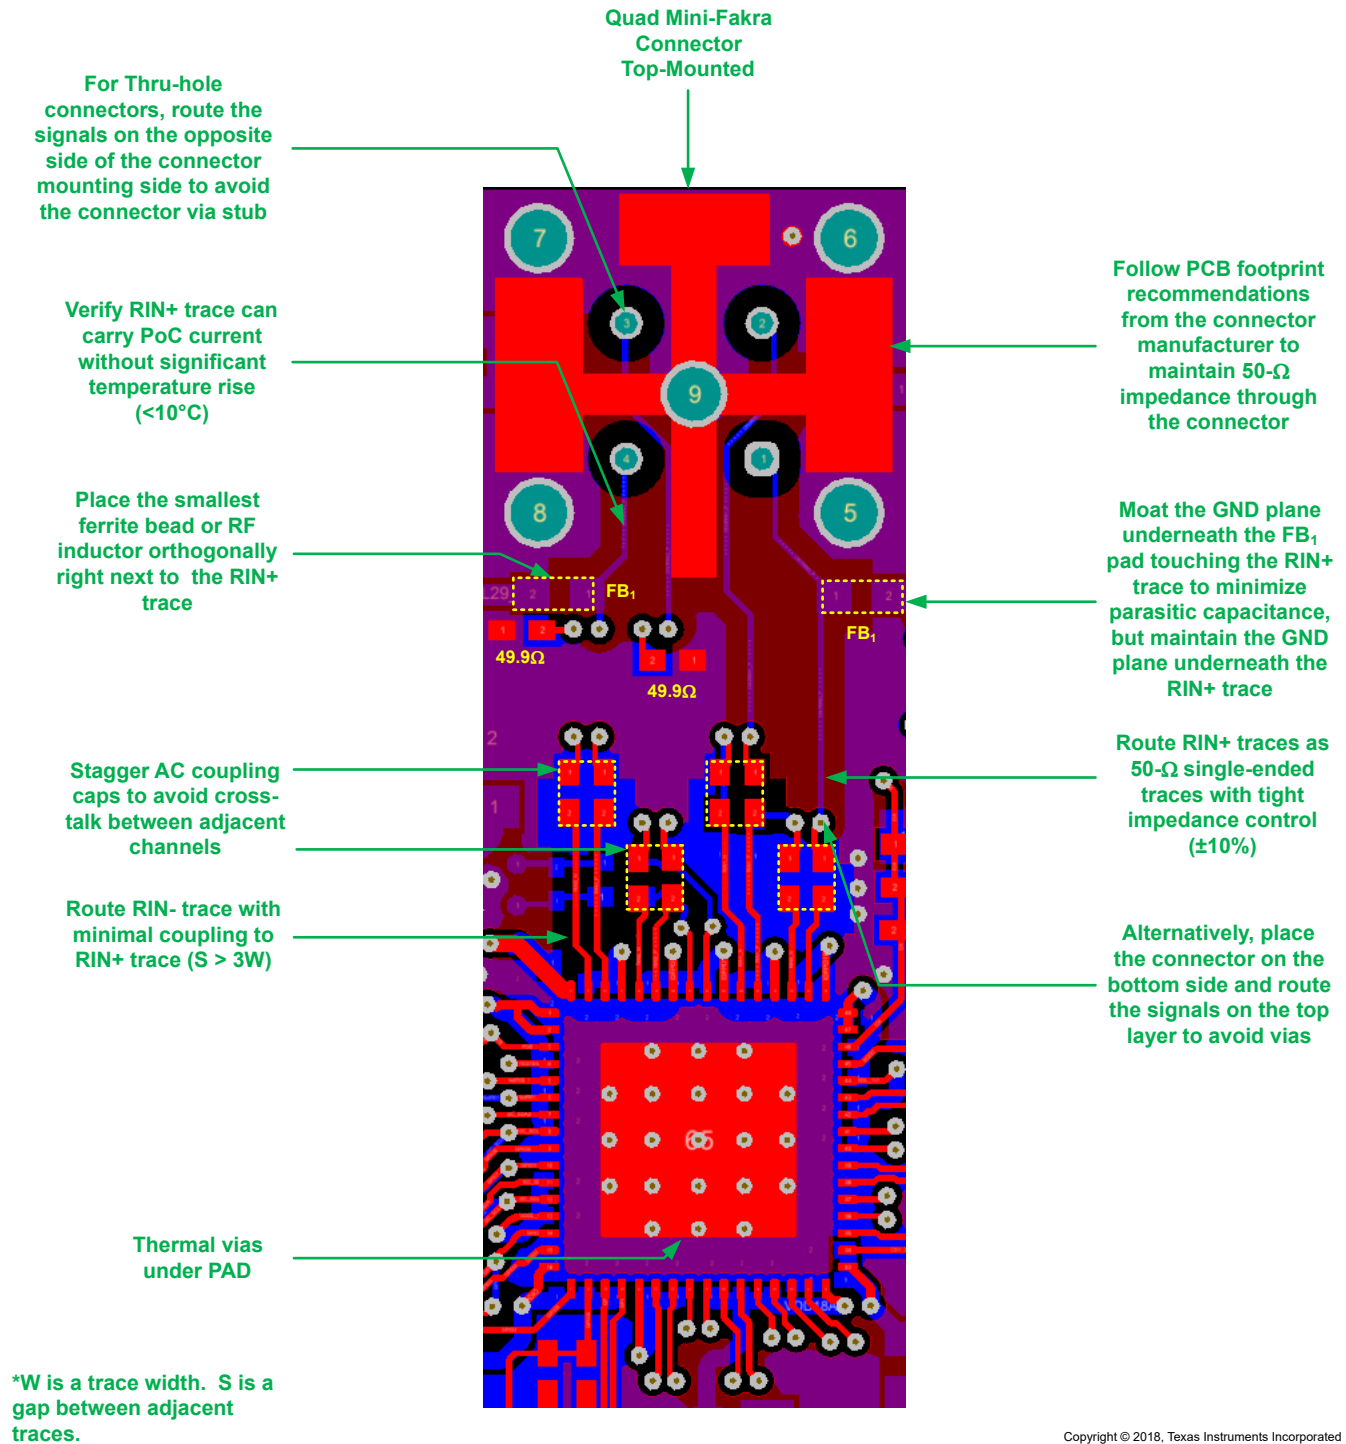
DS90UB964 Example PCB Layout With Quad Mini-Fakra Connector
